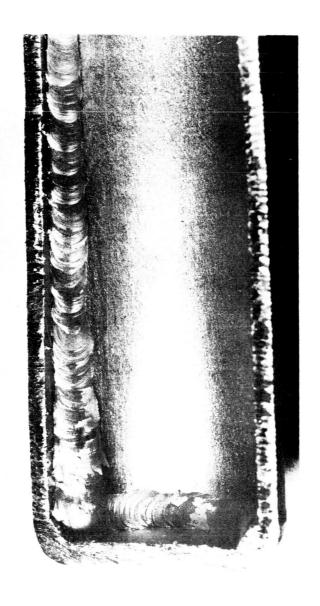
White Deposit Found in Weld in Liquid Zone of AS-55
